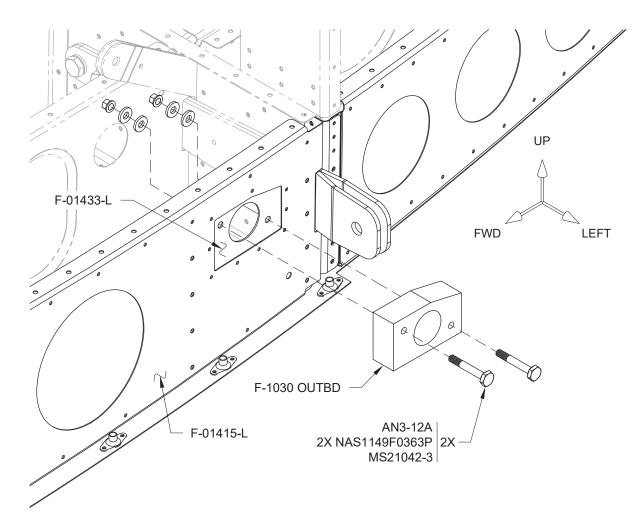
INSTALL OUTBOARD BUSHING (LEFT SIDE SHOWN)
